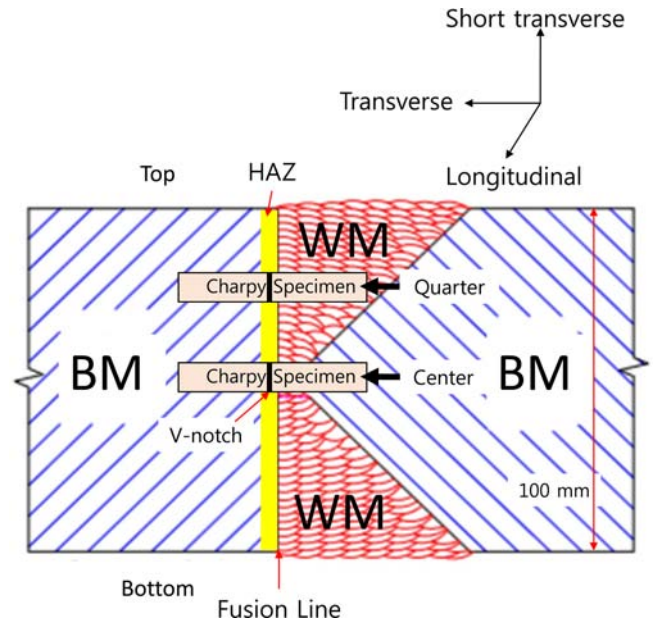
Schematic illustration of K-groove and weld layers for the FCAW(Flux cored arc welding) method(BM : base metal, WM : weld metal, HAZ : heat affected zone).
